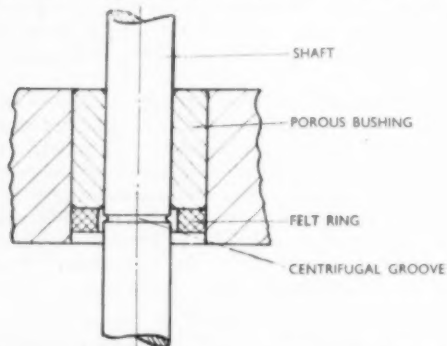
Prevention of oil outflow in vertically mounted bearing.
